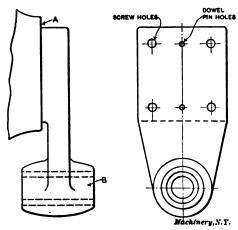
A Case where the Bushing Hole is Bored Previous to Locating and Fastening Bracket on Jig Body
